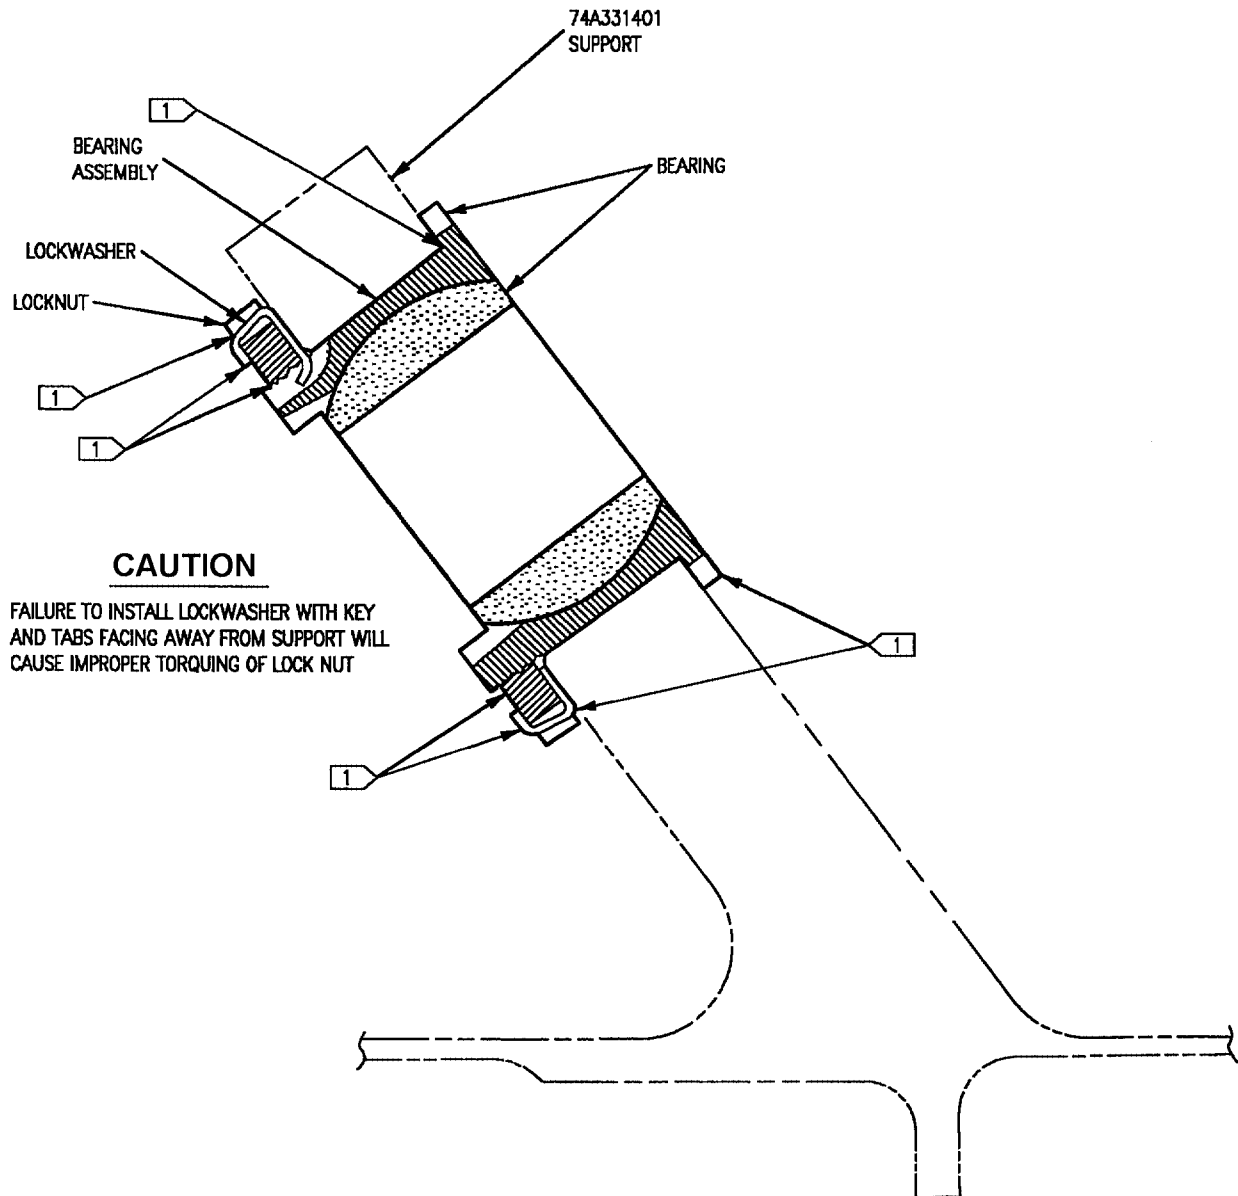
Support 74A331401, Bearing KDP16 Repair (Sheet 4)
